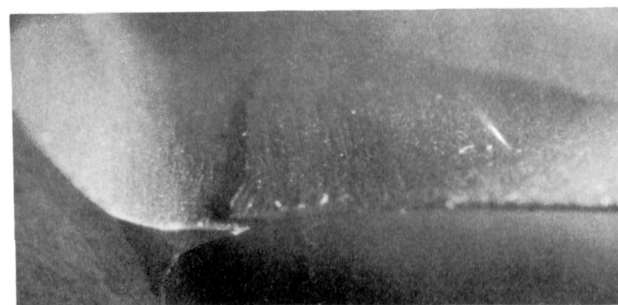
FRACTURE SURFACES OF BOTH FAILED BLADES. CRACK PROGRESSION WAS IN FATIGUE OVER 85% OF THE SURFACE. MAGNIFICATION: 9X
